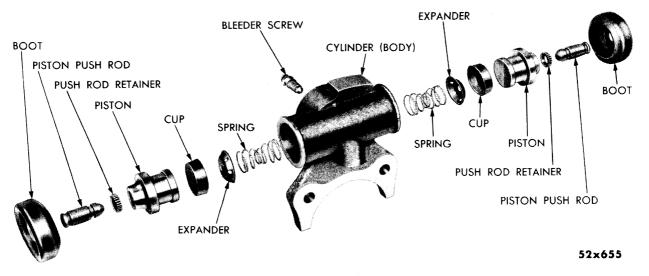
Rear Wheel Brake Cylinder (Disassembled View)
